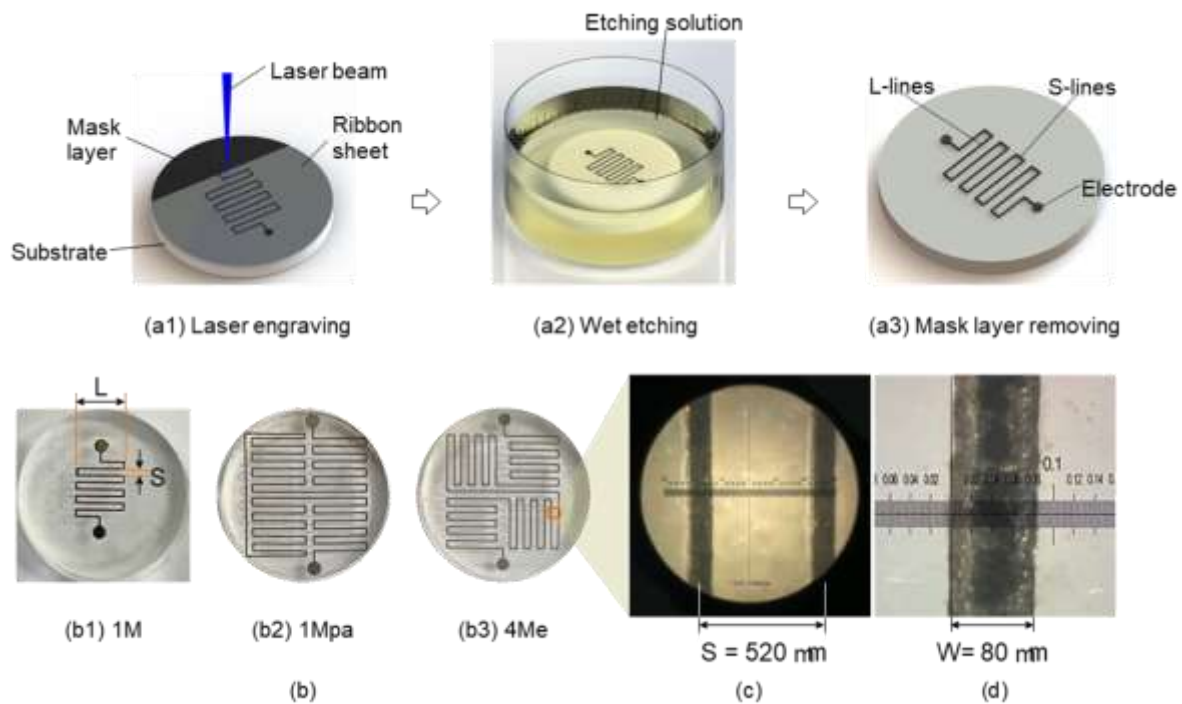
(a) Sample fabrication processes: layer mask spin coating and laser engraving (a1), wet etching (a2), mask layer removing; (b) pictures and optical microscope images of sample after fabrication.
